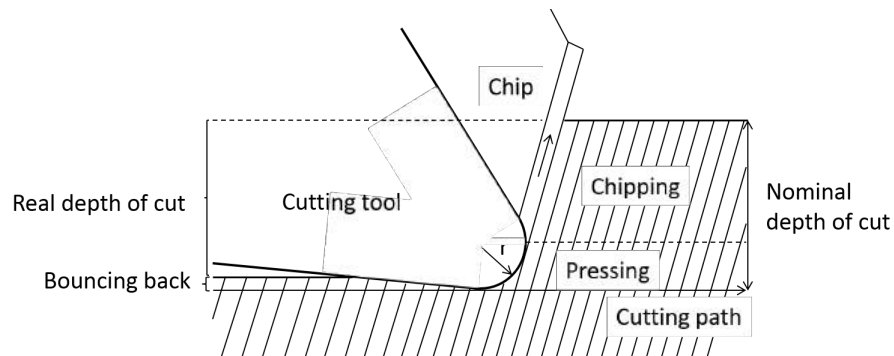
Tool-workpiece interaction when machining with a round cutting edge [11, 24].
